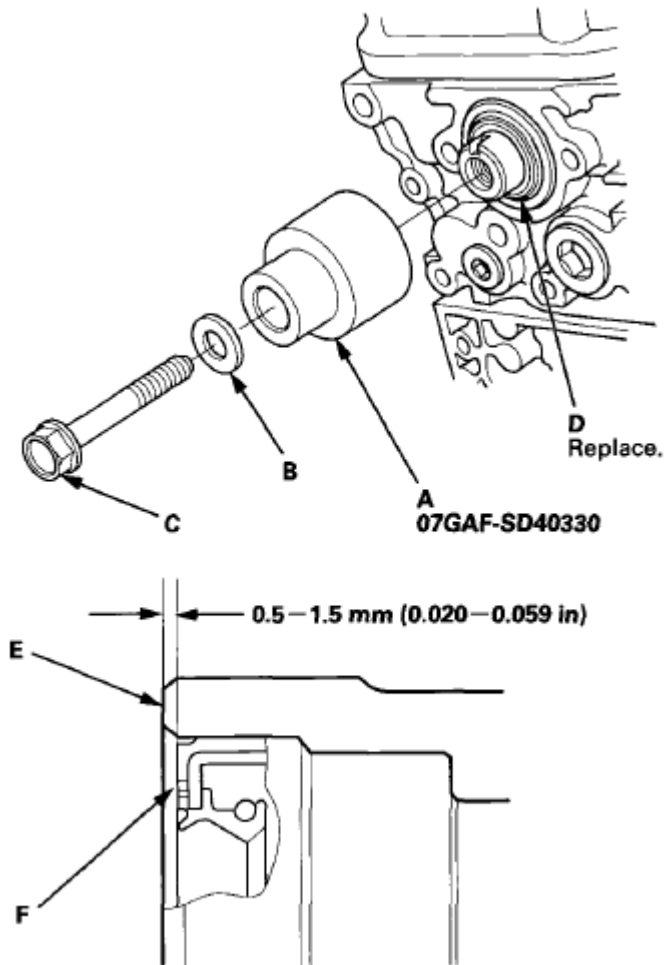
Identifying Camshaft Oil Seal And Related Components
